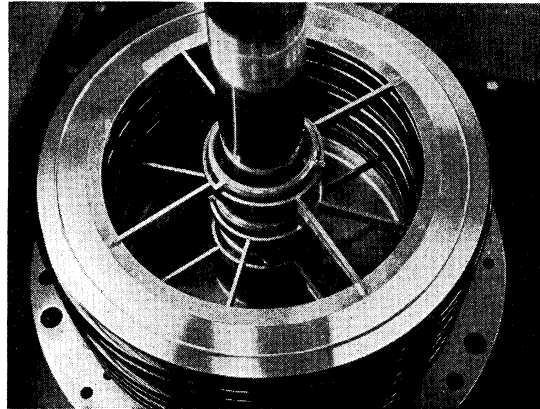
Photograph taken during assembly of a section of the accelerating tube.
